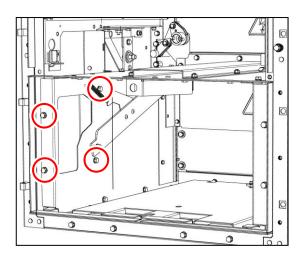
4 bolted joints on metal cover in voltage transformer compartment
